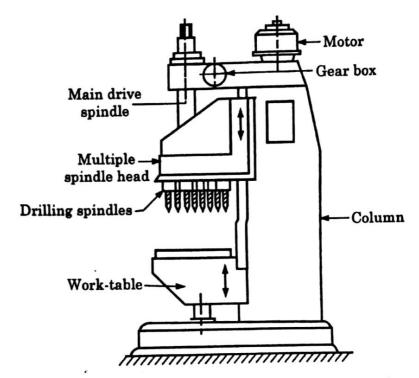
Non-Adjustable Multi-Spindle Drilling Machine
